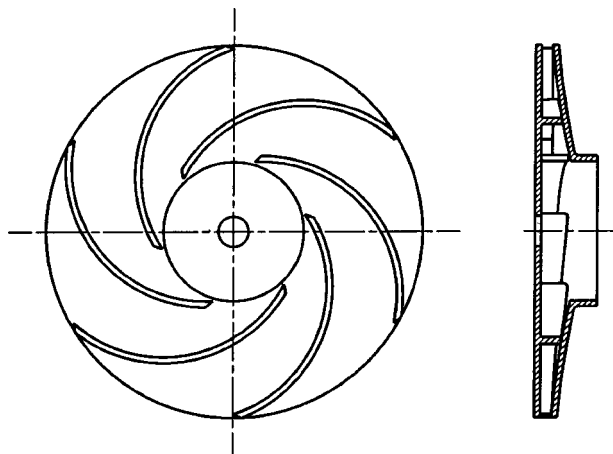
Blade-to-blade (left) and meridional (right) view of the shrouded centrifugal pump impeller, [13]
